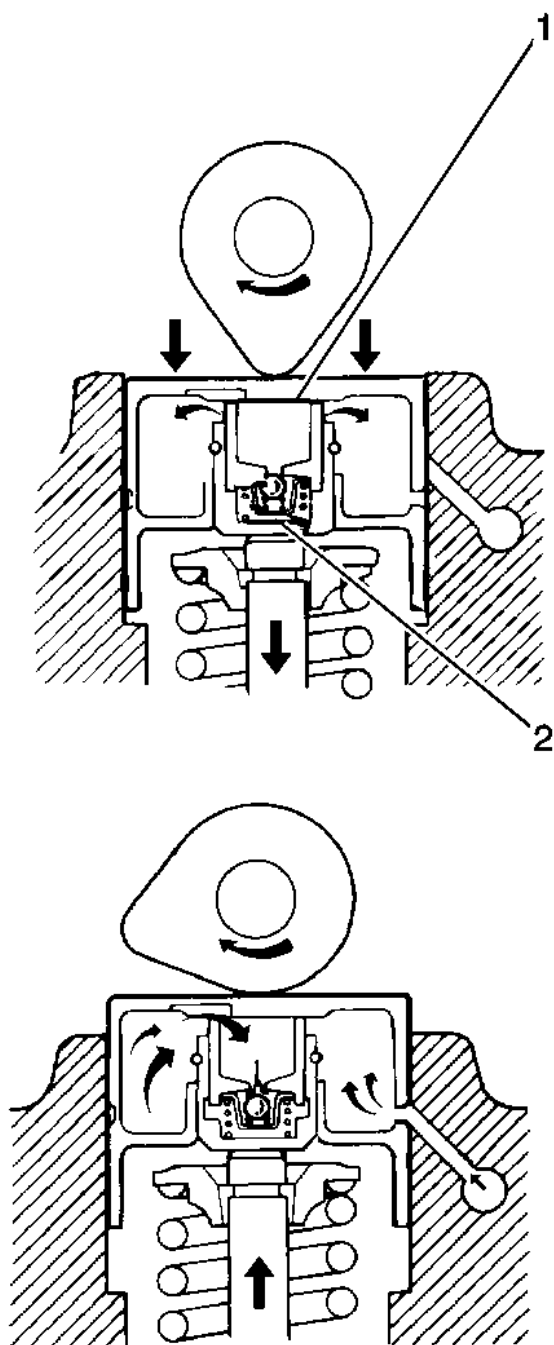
View Of Hydraulic Valve Lash Adjuster
